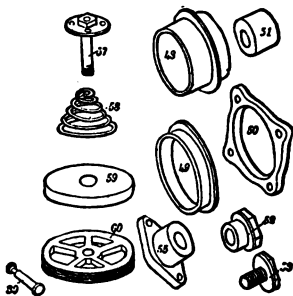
DETAILS OF WORTHINGTON PUMP.
